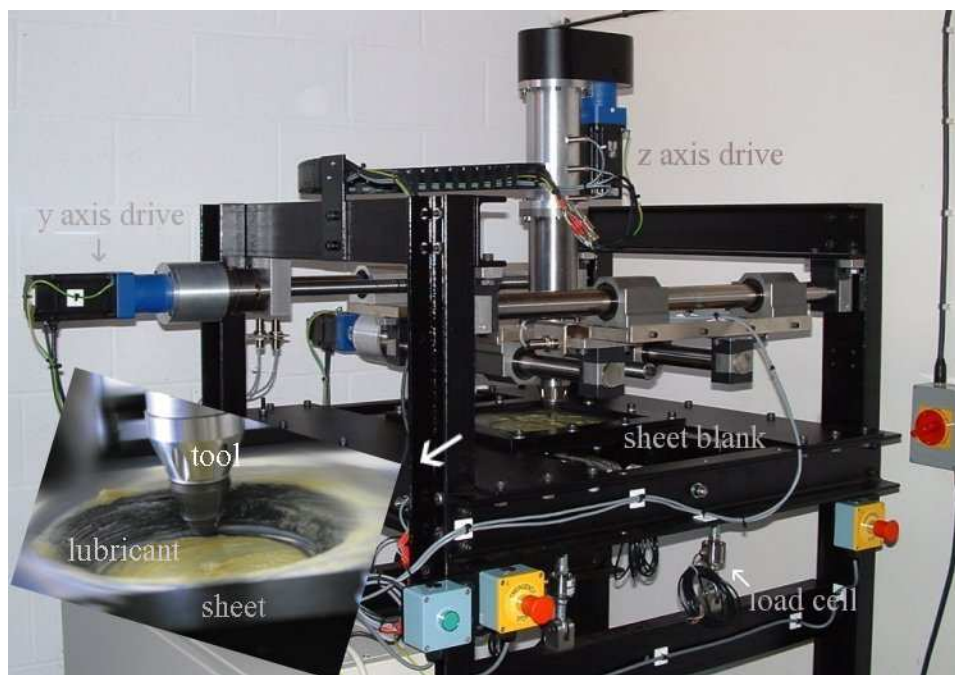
Image of the Cambridge ISF machine. Enlarged on the bottom left is an image of the indenting tool in contact with the sheet. The load cell labelled is one of six that are used to measure tool-sheet contact forces.
